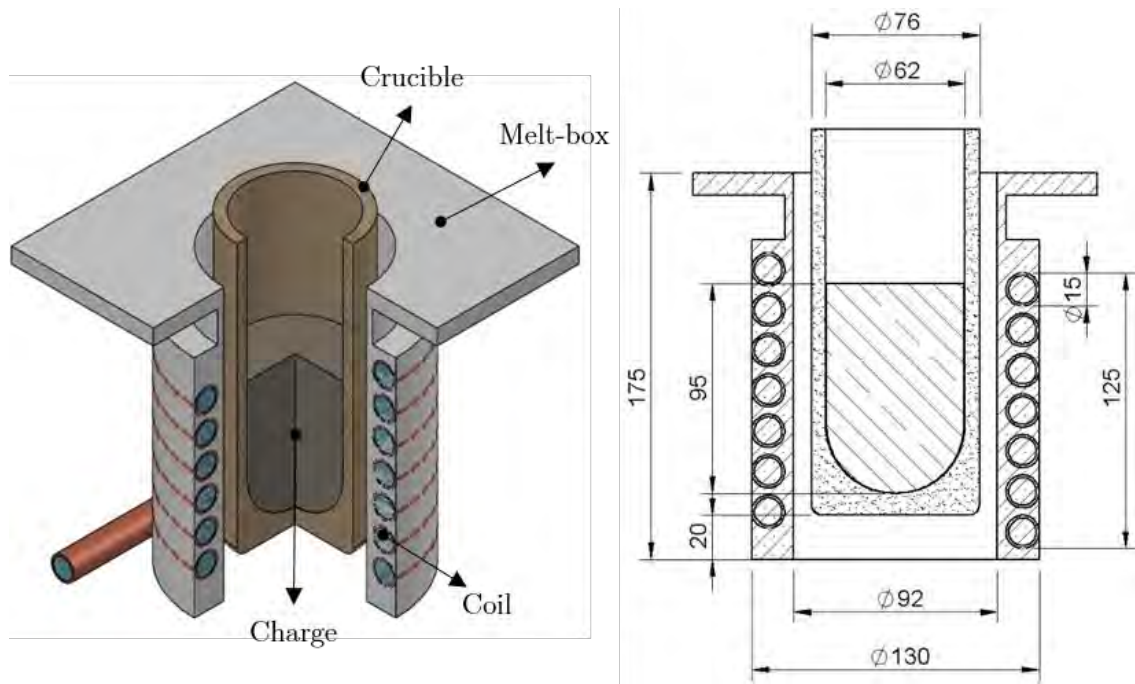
3D melt-box and section view of the geometry with principal dimensions.
